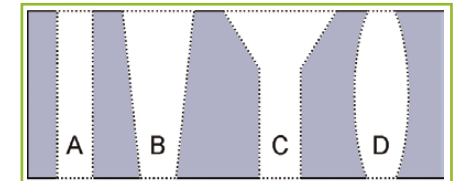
, examples of different through-hole geometries in glass (cross section view)
